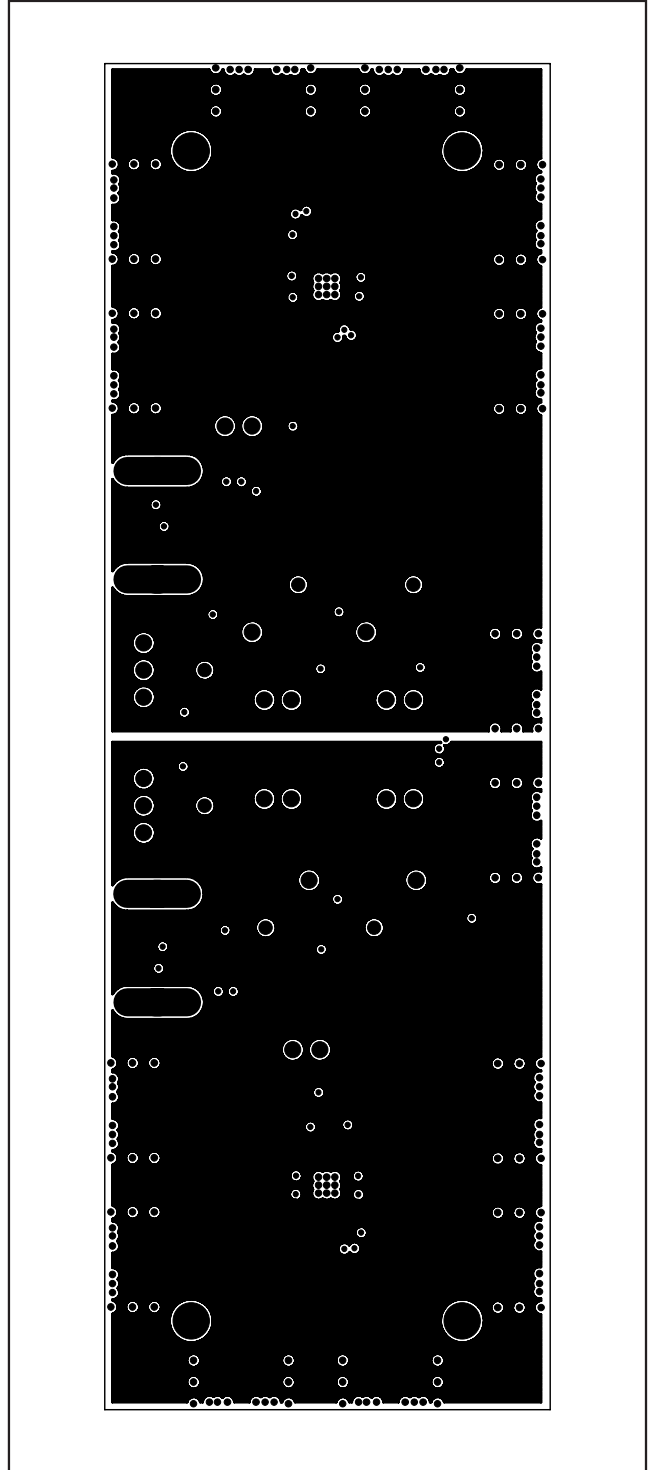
MAX3991/MAX3992 EV Kit PCB Layout—Power Plane
